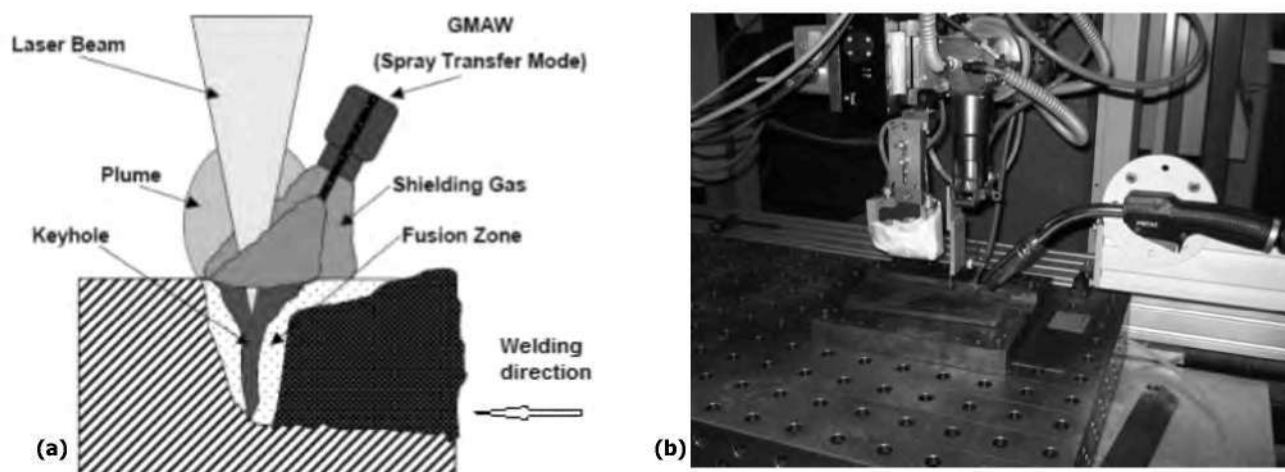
(a) Schematic of laser hybrid welding; (b) Laser-MIG welding set up at ARCI
